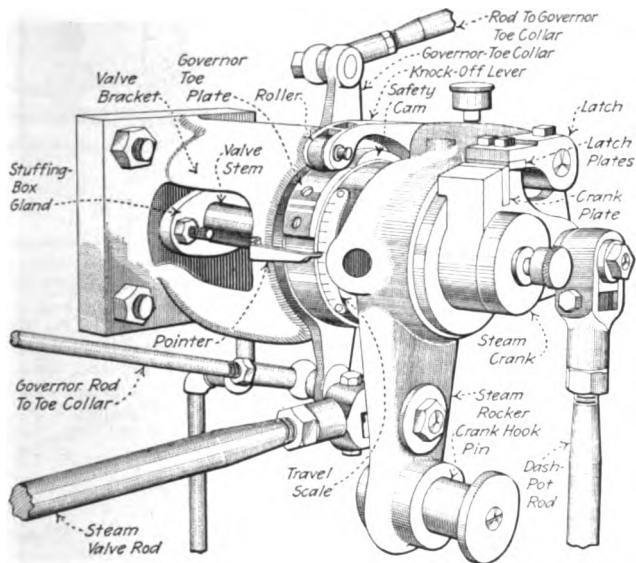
Gravity trip gear of Hamilton Corliss engines.
